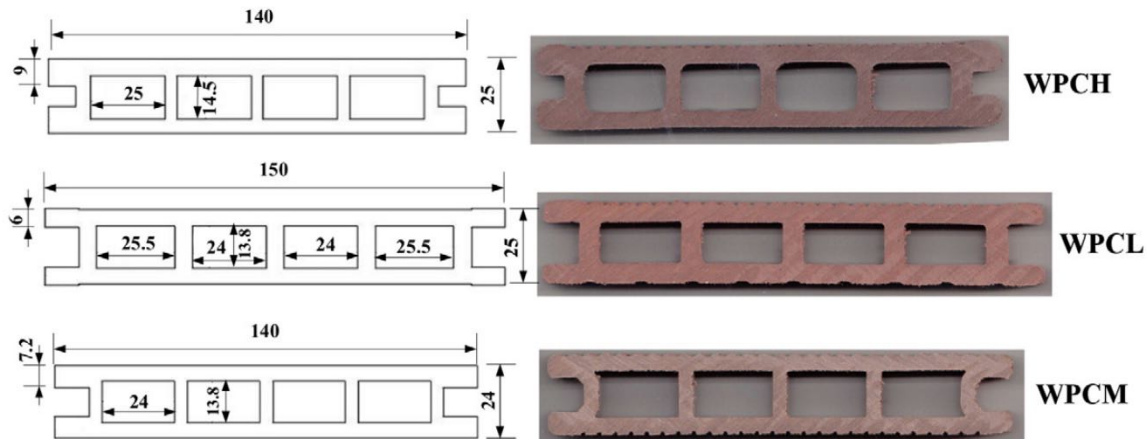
Hollow cross-section profiles and dimensions (mm) for the three types of WPC boards tested.
